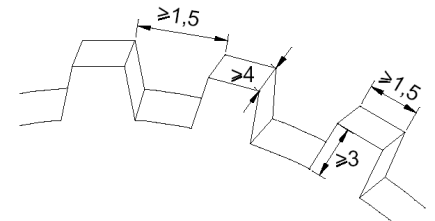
Minimal dimensions of a tooth wheel (all distances in millimeters)
